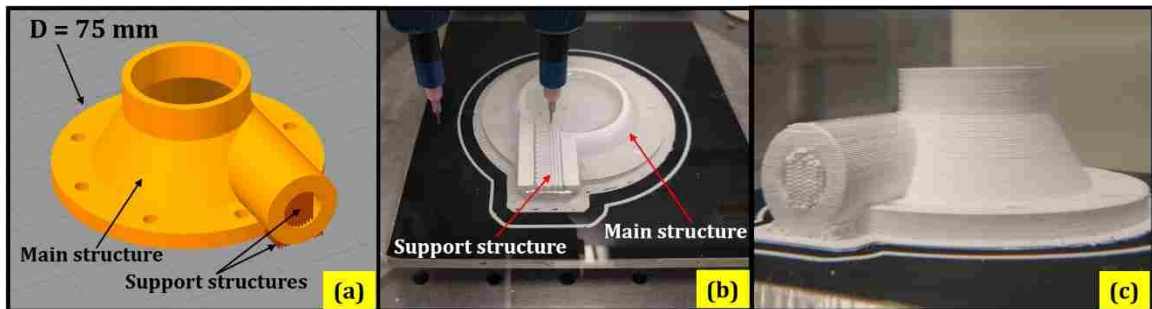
Sample turbine-blower housing: (a) CAD model with main and support structures, (b) Part being printed, (c) Completely printed part surrounded by oil.
